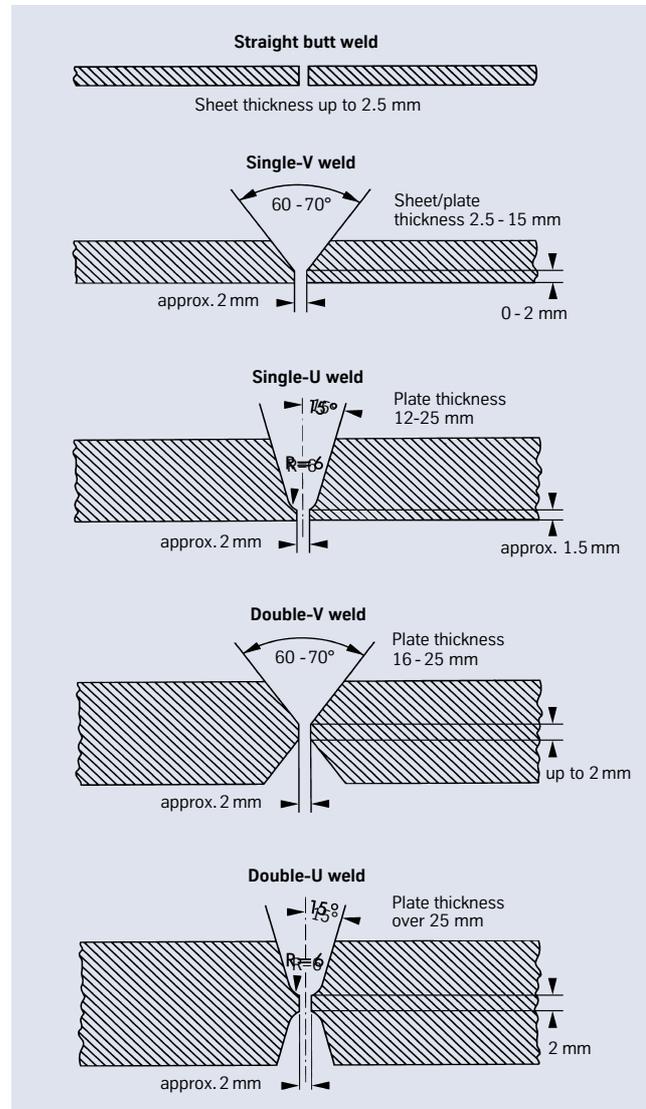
Edge preparation for welding of nickel alloys and special stainless steels.
